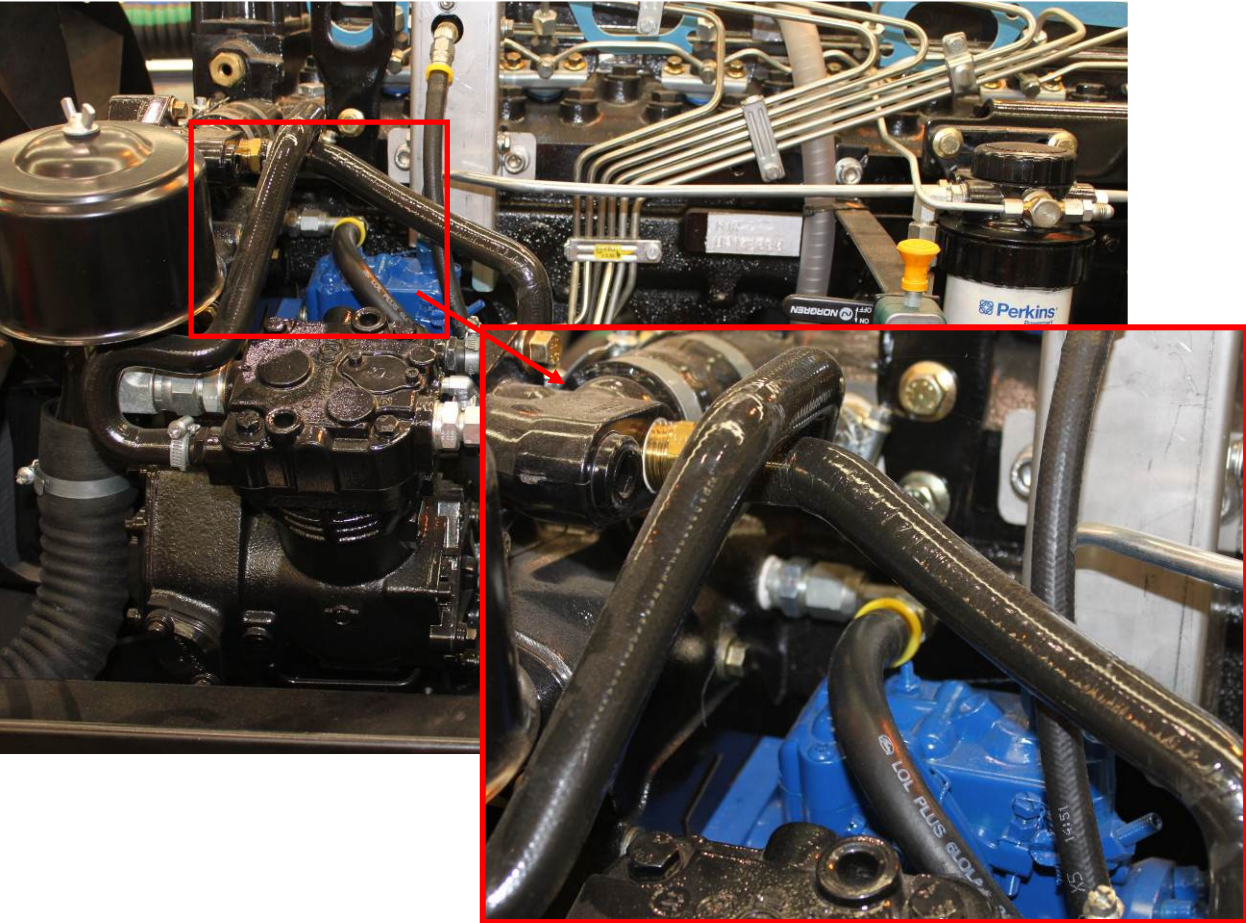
Coolant loss valve supply hose now installed directly to rear of water pump via existing threaded port.
